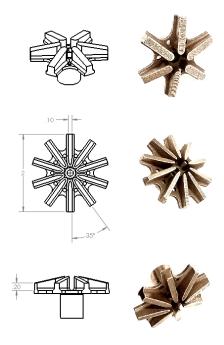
Solidworks CAD of the test impellers and the Stainless steel DMLS printed final product
